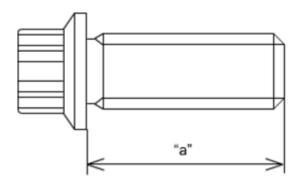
Identifying Bolts Length Courtesy of SUZUKI OF AMERICA CORP.
